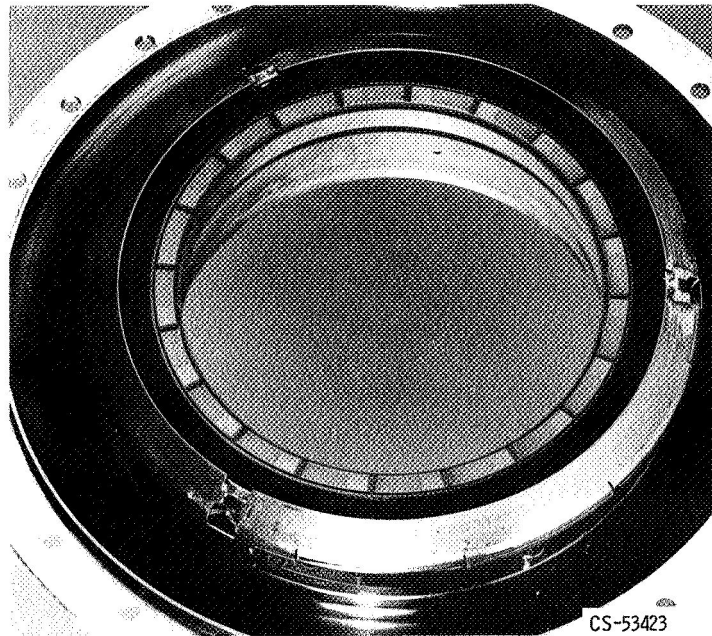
Gas-film seal assembly nosepiece after 120-hour endurance test.
